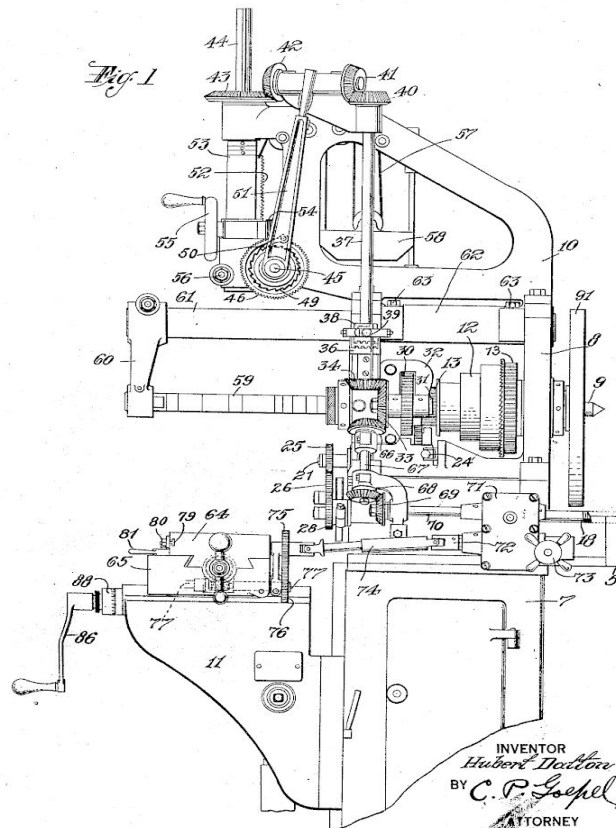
US Combination Lathe, Milling, and Drilling Machine
